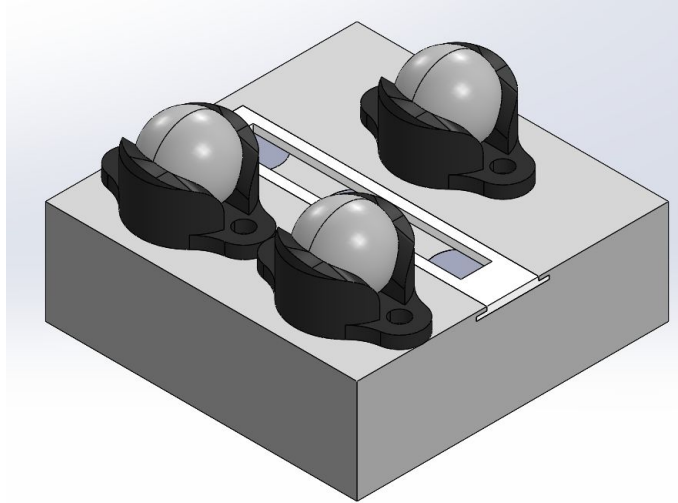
The CAD model of the final microphone housing assembly as seen from an isometric view
